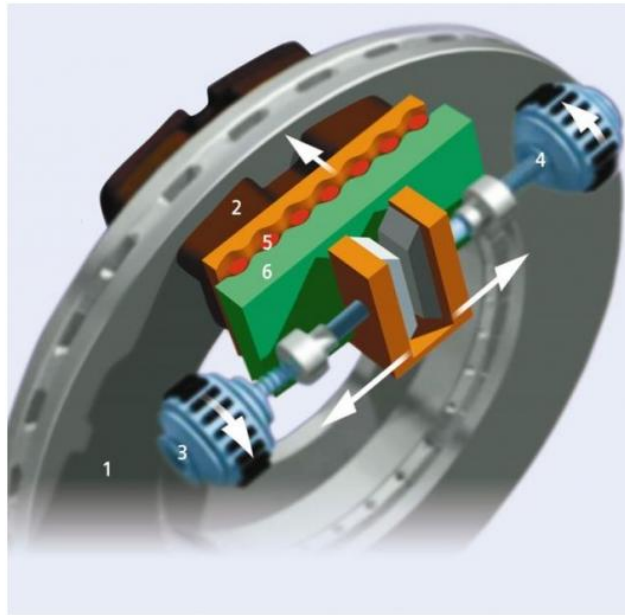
VDO electronic wedge brake (EWB). Parts: 1 - brake disk; 2 - brake pad; 3 - electric motor; 4 - electric motor; 5 - rollers; 6 - wedge-shaped inclined faces. Figure taken from [93].
